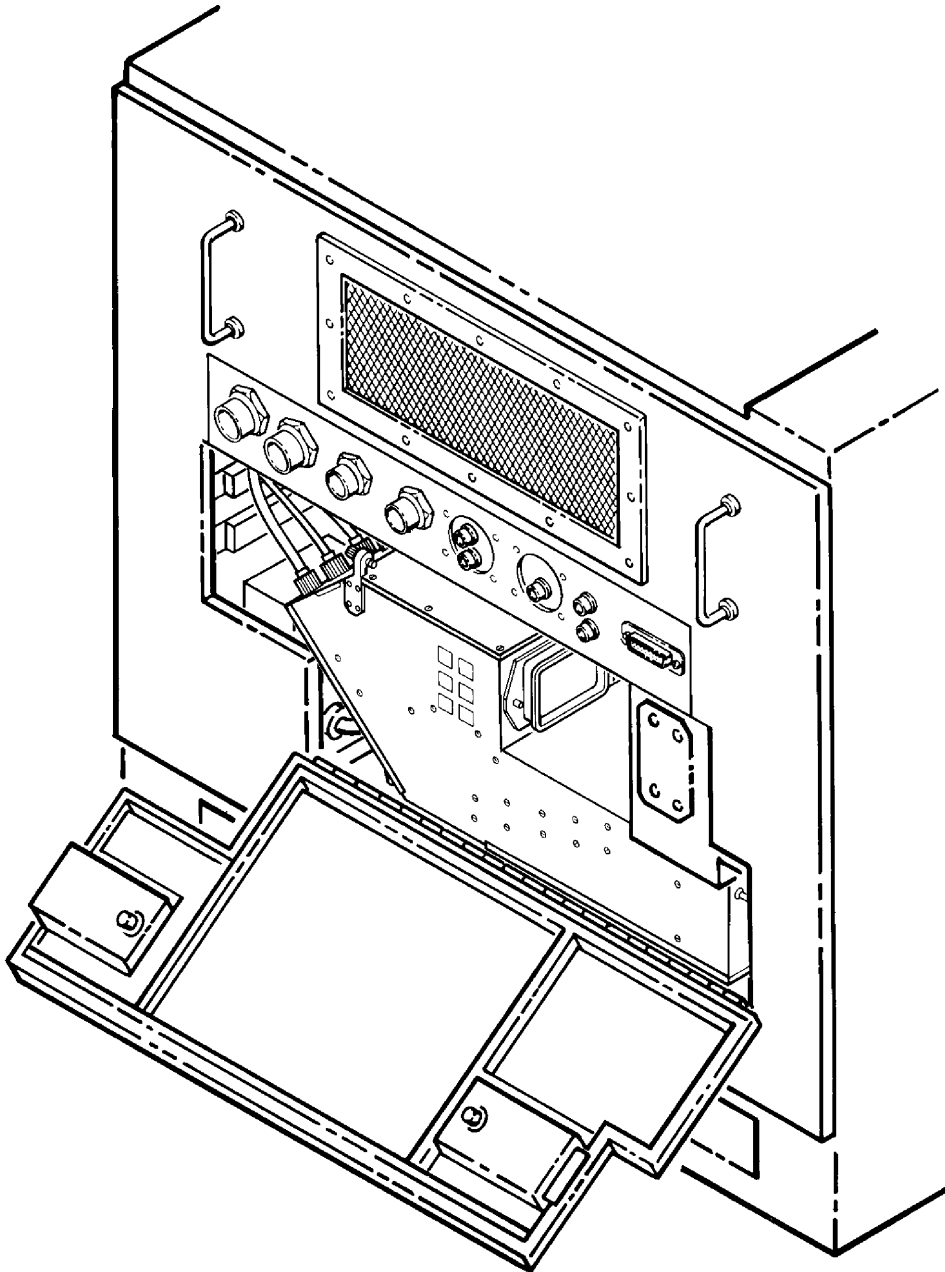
OSA IVD Electronics Assembly Mounting Bracket Positions
